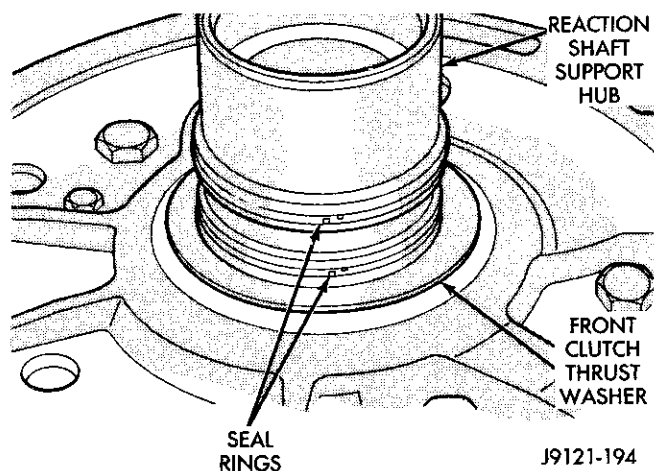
Reaction Shaft Support Seal Rings And Front Clutch Thrust Washer
